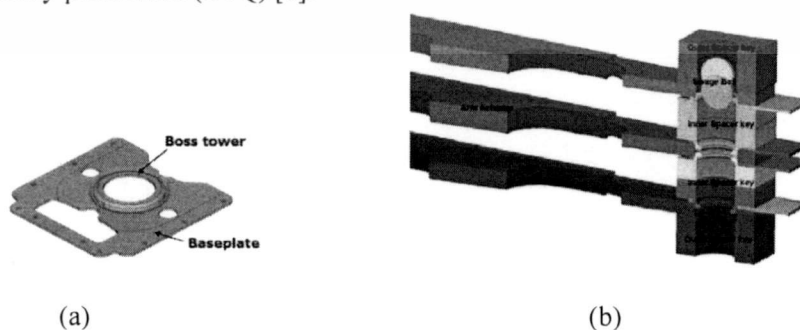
(a) Components of a base plate (b) the Head Stack Assembly for swaging process
